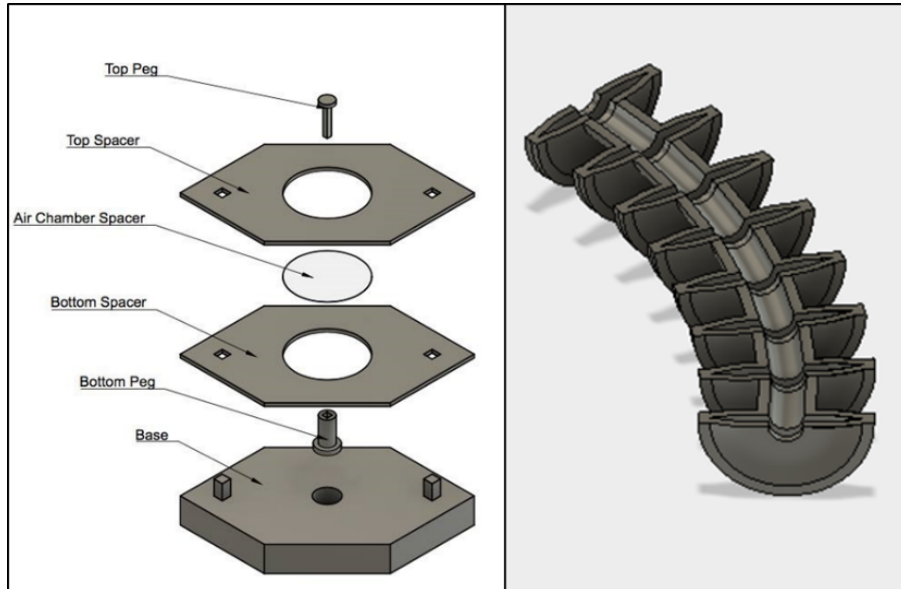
CAD model showing breakdown of parts of the bellow mold (left) and a cross-sectional view of the resulting bellows (right).
